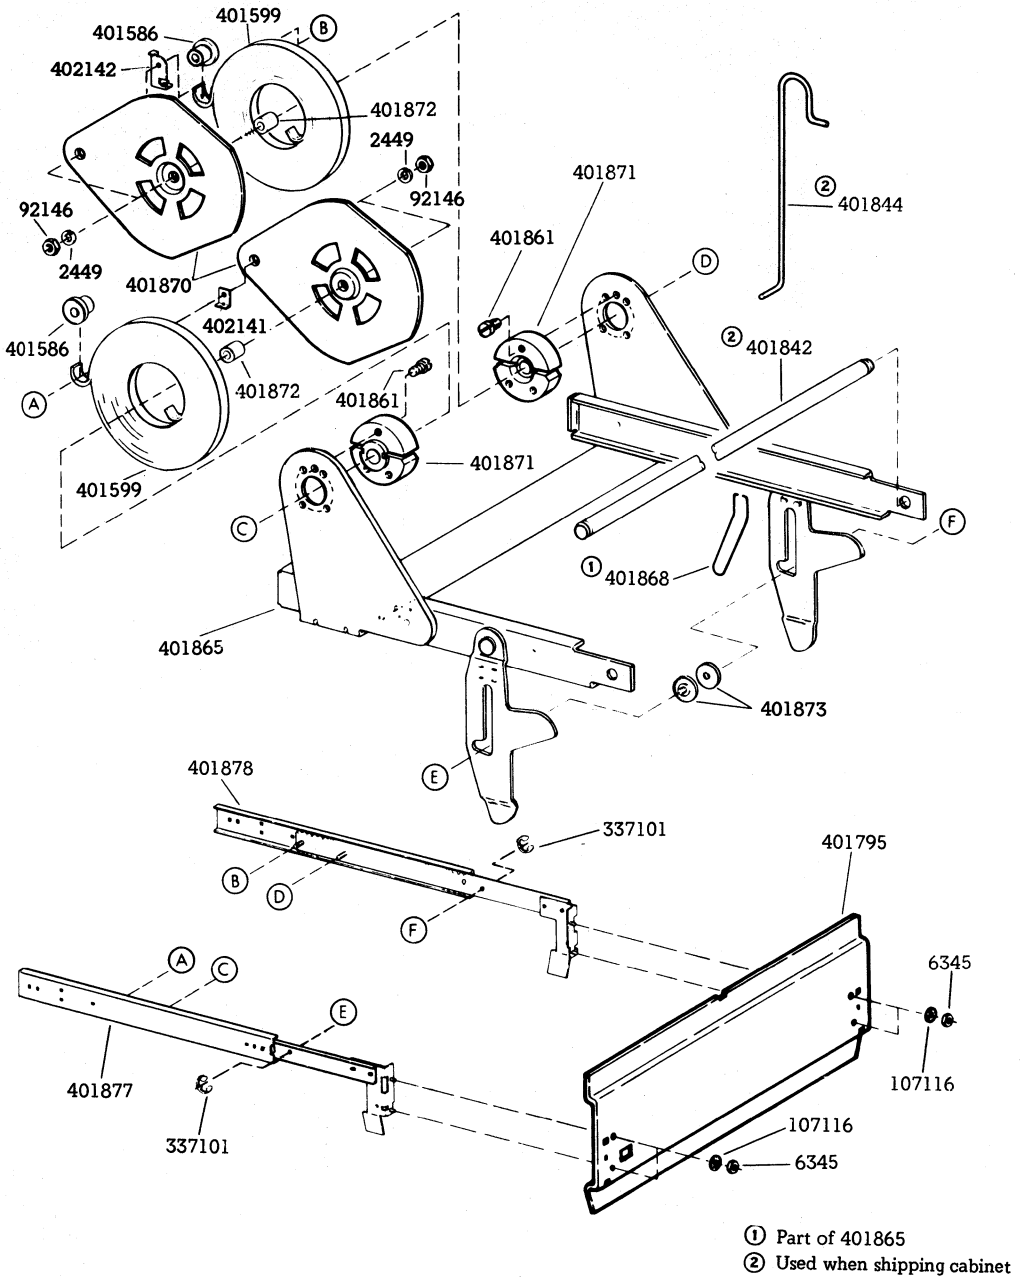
CAB251/AA Printer Under Monitor Cabinet Mounting Cradle
